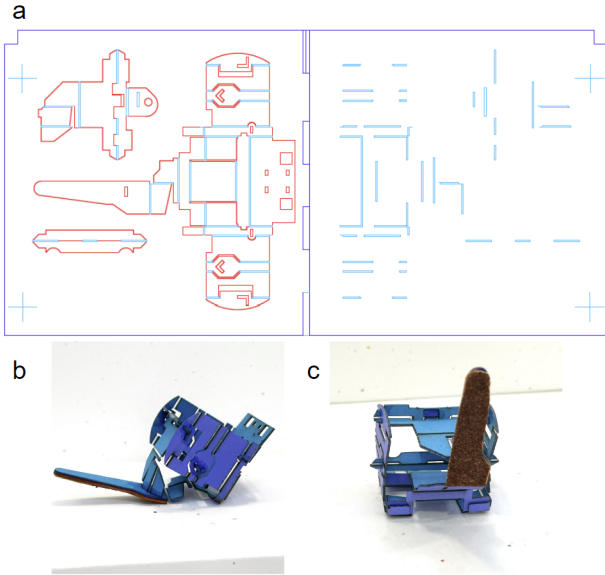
(a) Autocad design for laser cutting of Single Leg Design Clari-Mega Leg Module 1; (b) side view of single-leg module; (c) bottom view of single-leg module
